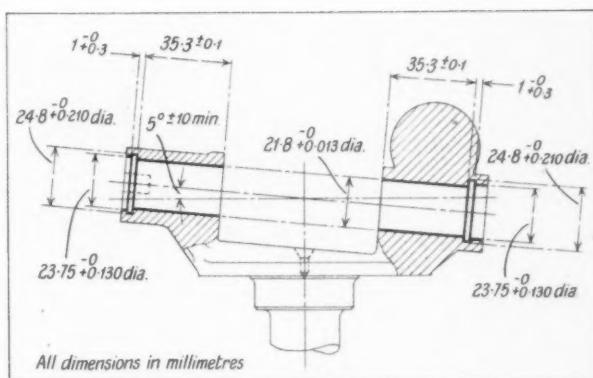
The King-pin Bosses are Drilled, Recessed, and Fine-bored, to the Dimensions Indicated, on the Hüller Special-purpose Machine Shown in Fig. 12 and 13
